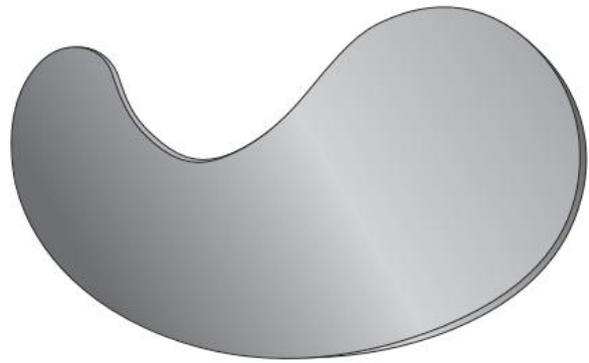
Hand scraper for curved work; in sharpening, take care to file smooth curves; use oilstone slip to hone concave edges, burnish as for rectangular scraper
